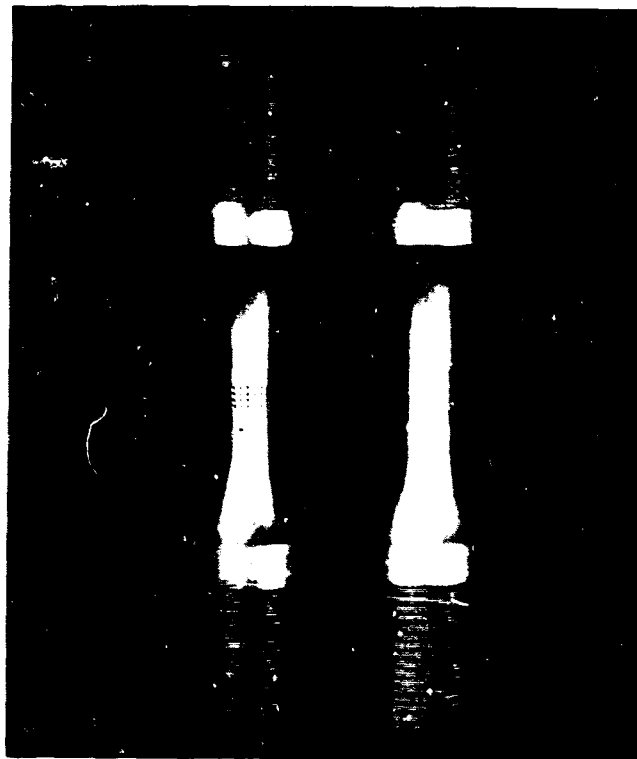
Typical Tubular Push-Pull Specimens with ECID Holes (Left) and EDM Holes (Right)
